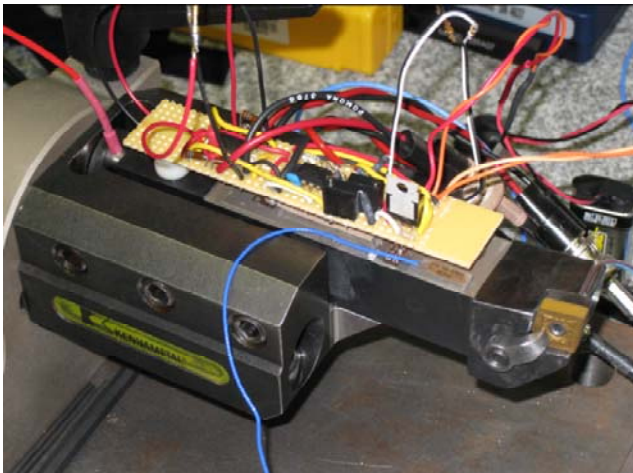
PRINTED CIRCUIT BOARD ON INSERT HOLDER
